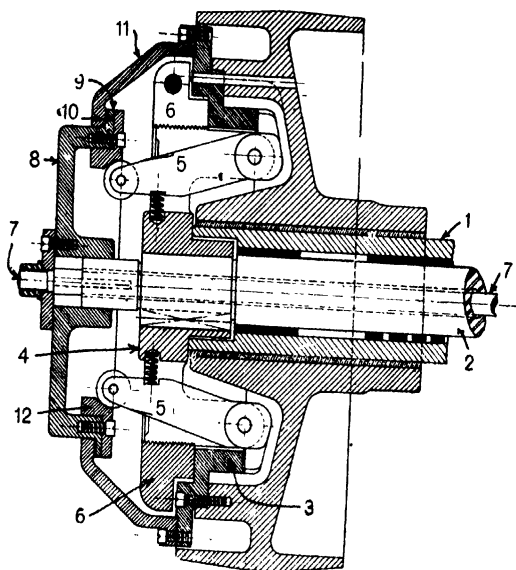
Clutch pulley used on Cincinnati milling machine.
